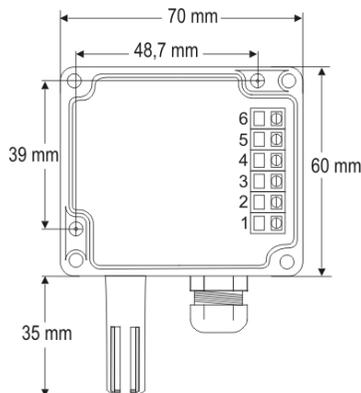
TEMP/WM fixing holes and housing dimensions.
